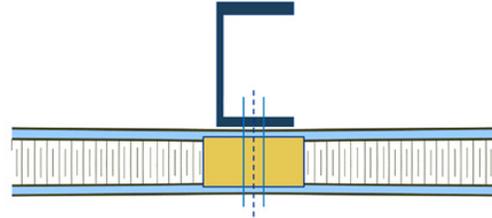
Sandwich Ring Frame Joint Concept 2:
